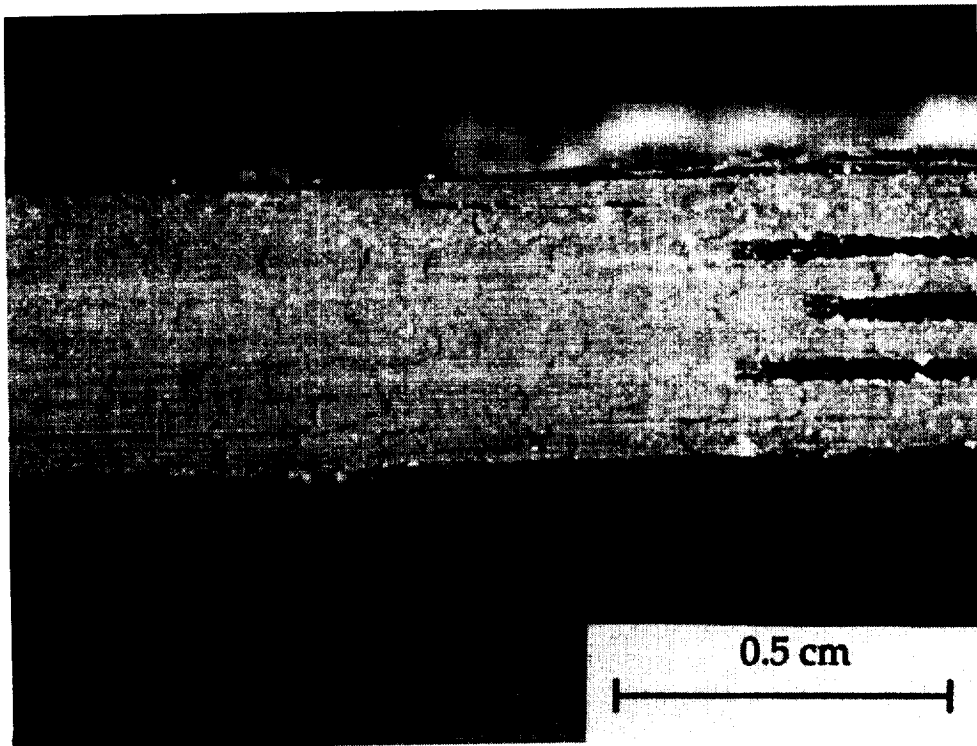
An edge-view near the fracture surface of  $[\pm 45^\circ]$  tensile specimen tested in dry ice ( $\text{CO}_2$ ).
